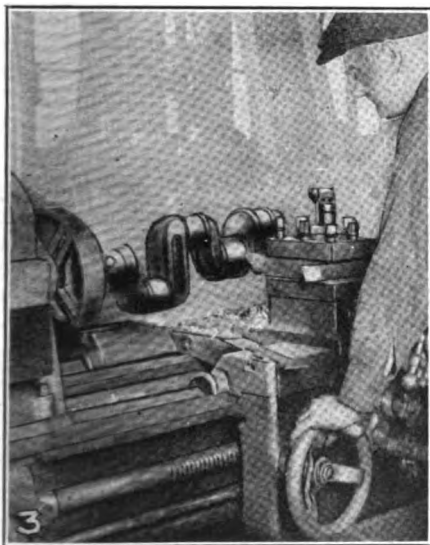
ROUGH-TURNING THE BEARINGS. FIG. 4. ROUGH-TURNING THE CRANKPIN
